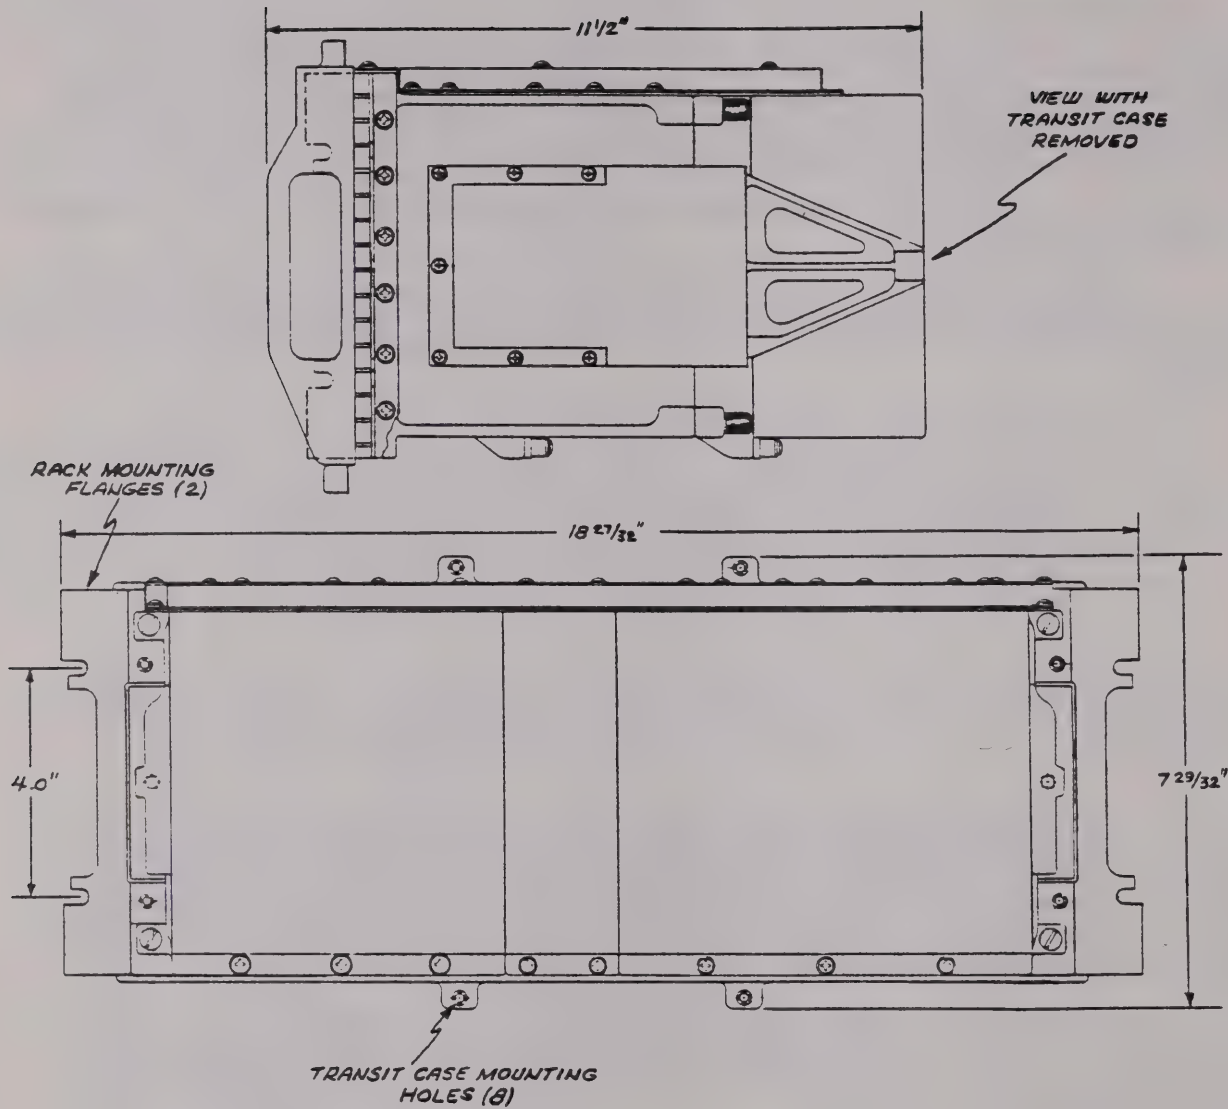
Radio Receiver R-1490/GRR-17, Outline Drawing
